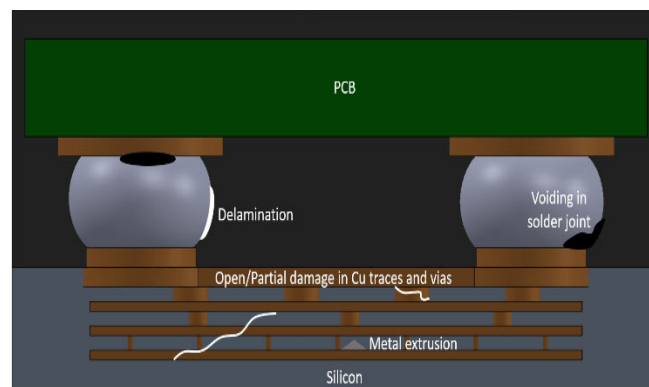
A schematic representation of damage in Cu traces/vias, dielectric layer damages, and cracks in solder joint
